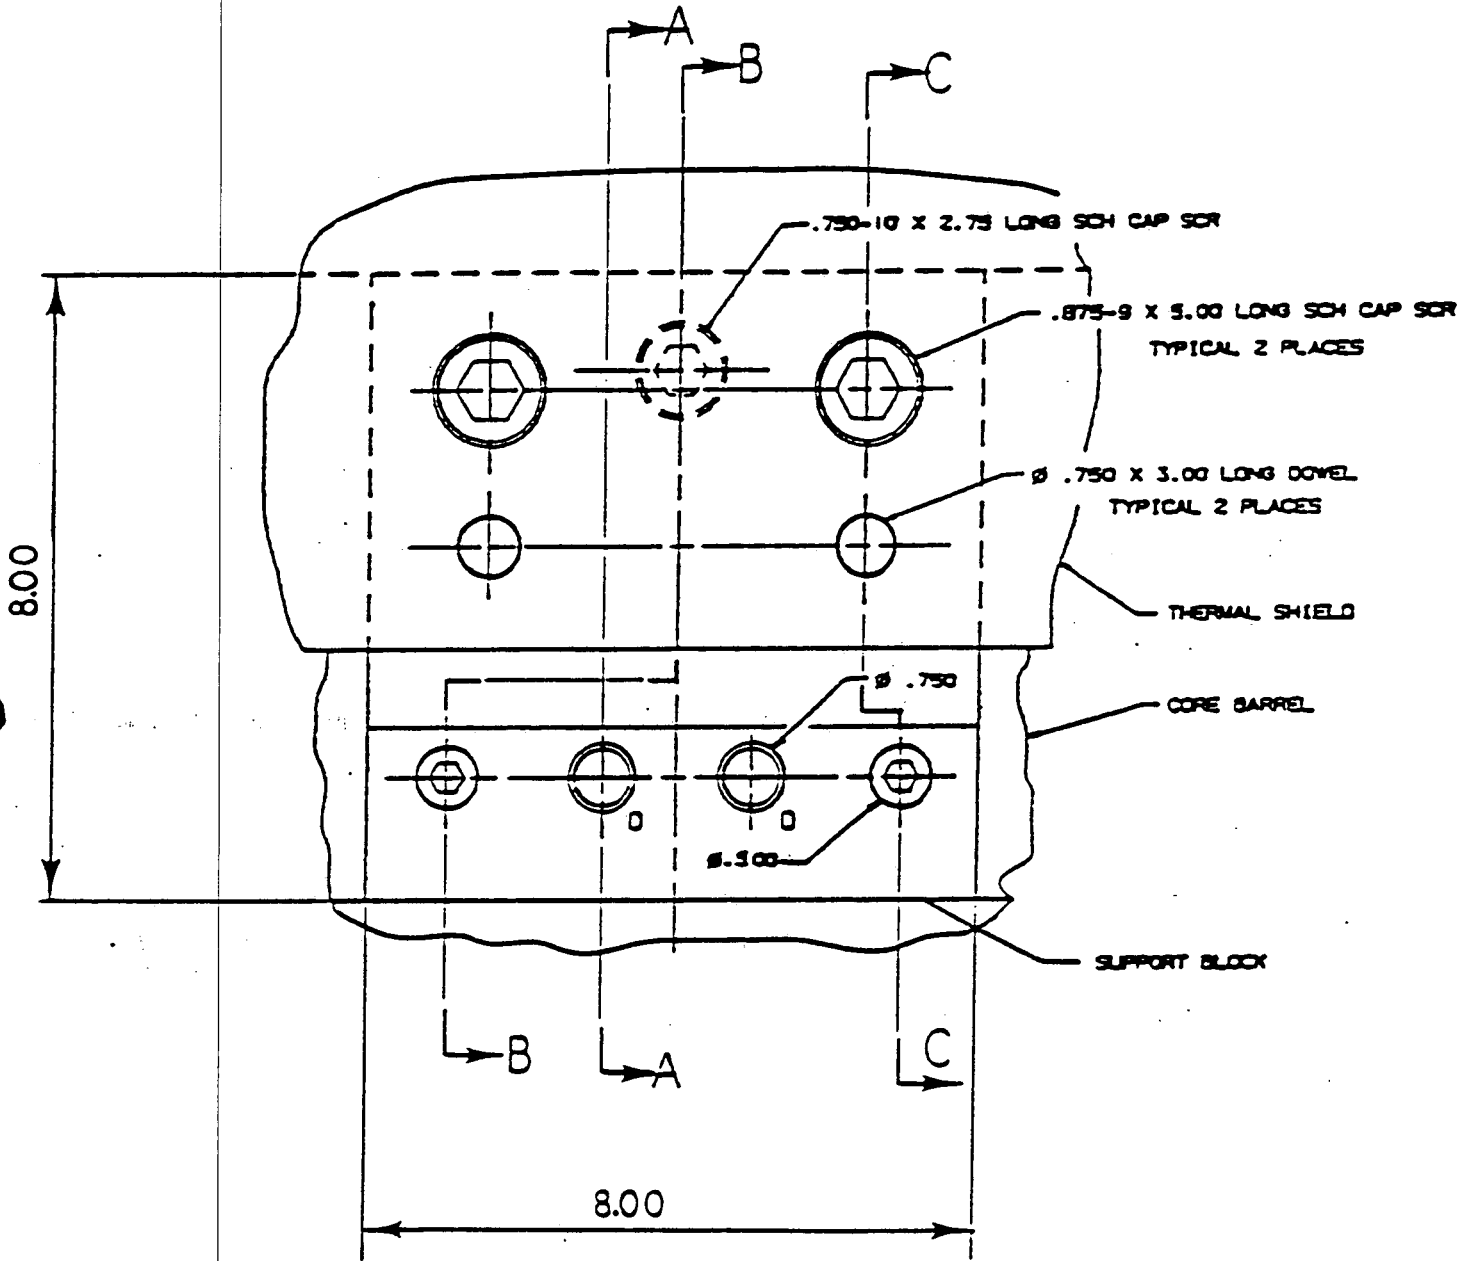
EXISTING LOWER SUPPORT BLOCK DESIGN
